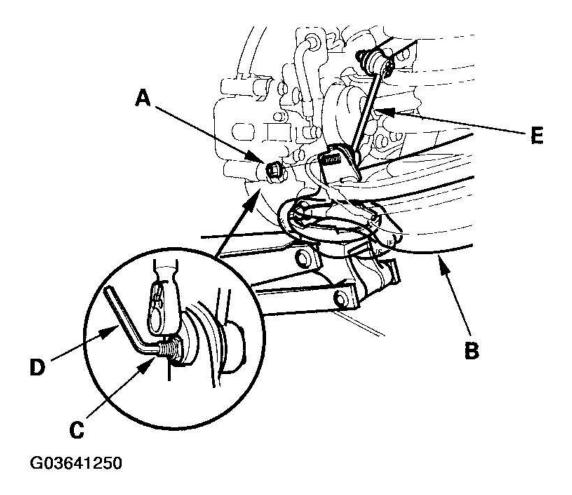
Placing Floor Jack At Connecting Point Of Lower Arm And Knuckle Courtesy of AMERICAN HONDA MOTOR CO., INC.
